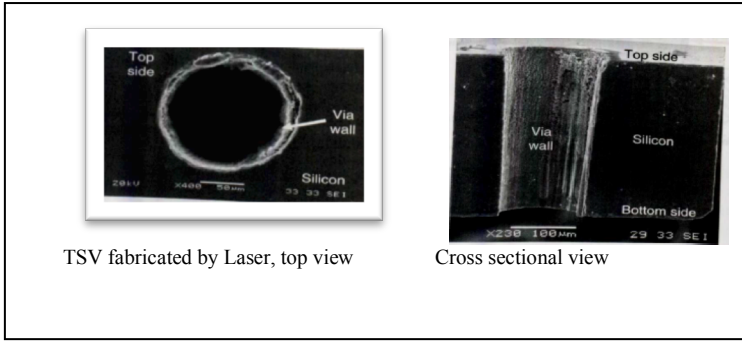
TSV fabricated by Laser, top & Cross sectional view [2]
